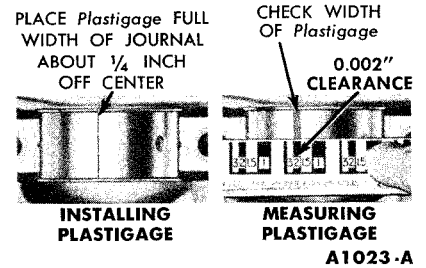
Installing and Measuring Plastigage—Engine Removed
